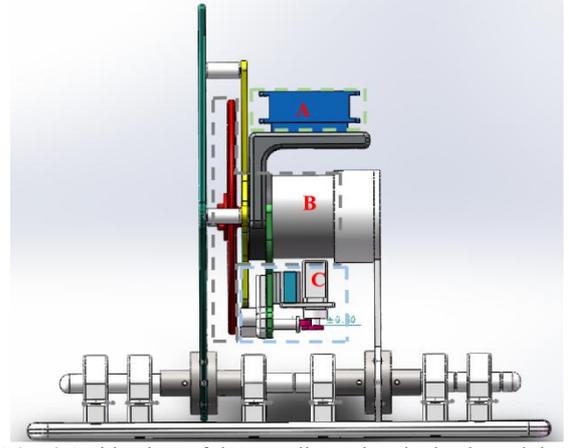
A side view of the one-dimensional wheel pendulum. The key modules in the system have been marked with dotted boxes: A. Control module, B. Drive module, C. Brake module.
